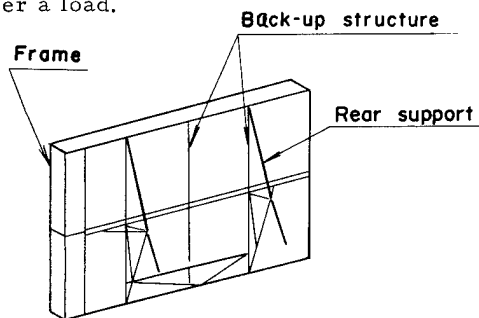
PLANAR ARRAY'S CONSTRUCTION
